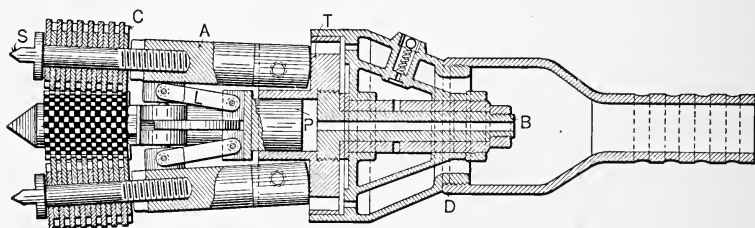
Mechanical Tube Cleaner — Turbine Type.
